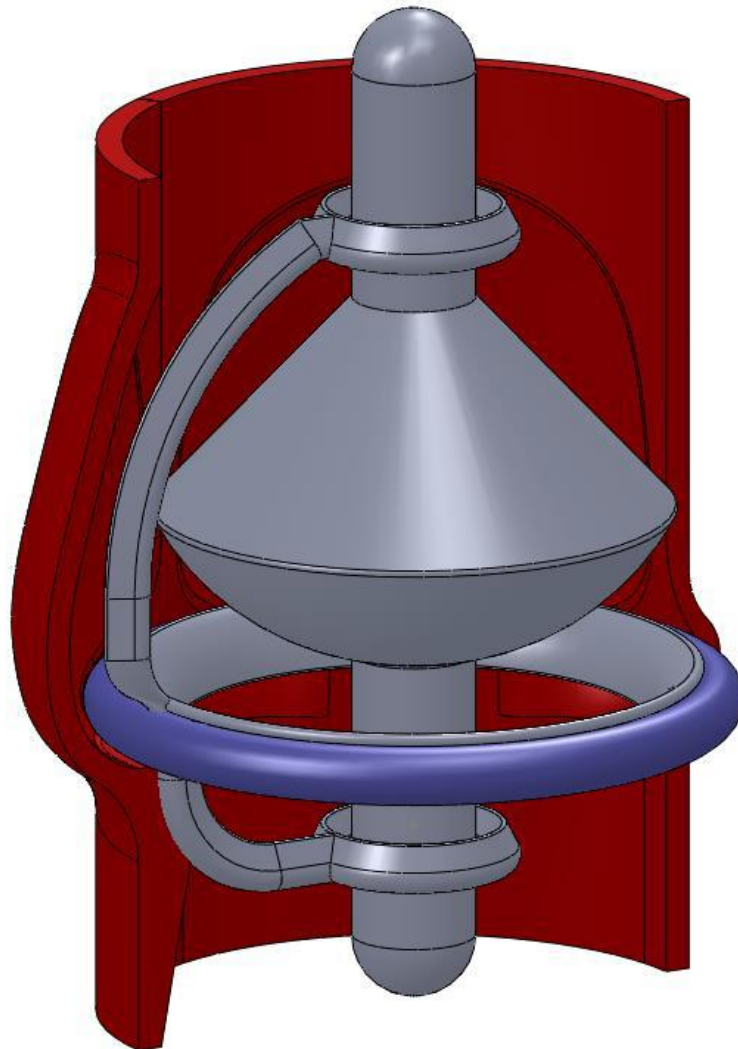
Isometric view of the artificial heart valve geometry
